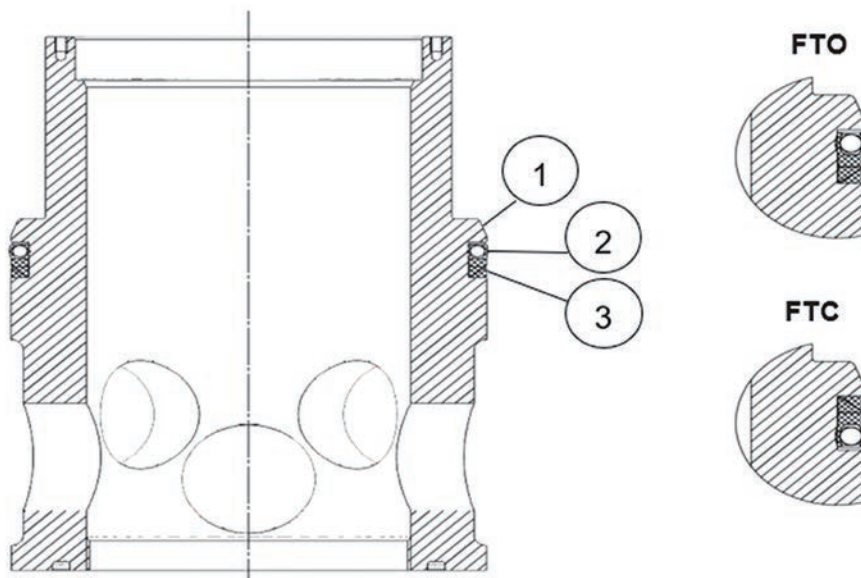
Principle Diagram of the Cage Lip Seal Mounting
